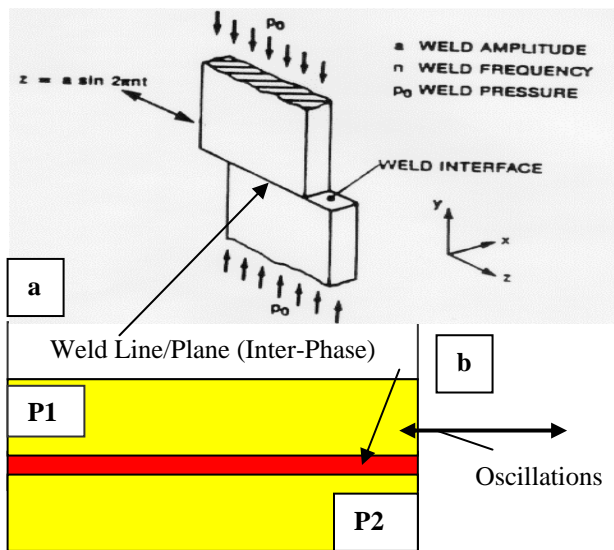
Weld line (inter-phase) formation during welding processing technology. Legend: a – linear vibration welding; b – inter-phase; P1 – heat affected area at part 1; P2 – heat affected area at part 2.
